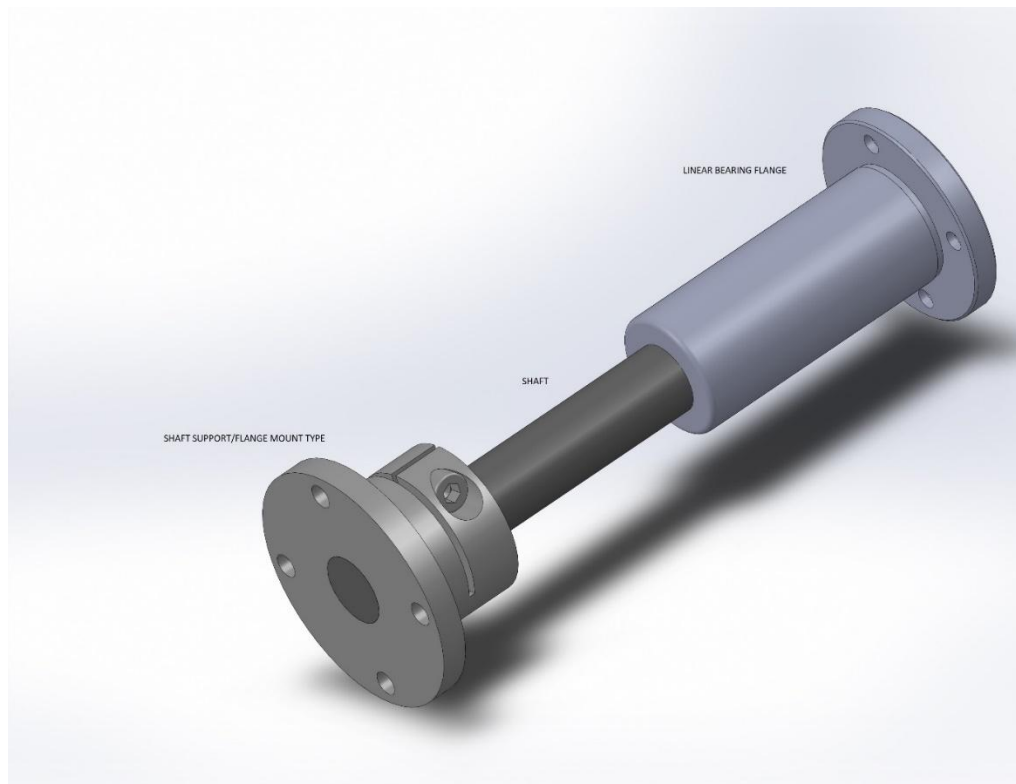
General arrangement for linear bearing assembly (Isometric view).
